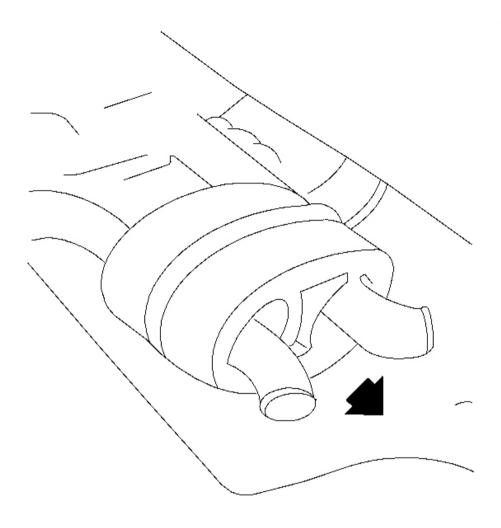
View Of Rubber Exhaust Hangers Courtesy of GENERAL MOTORS CORP.
